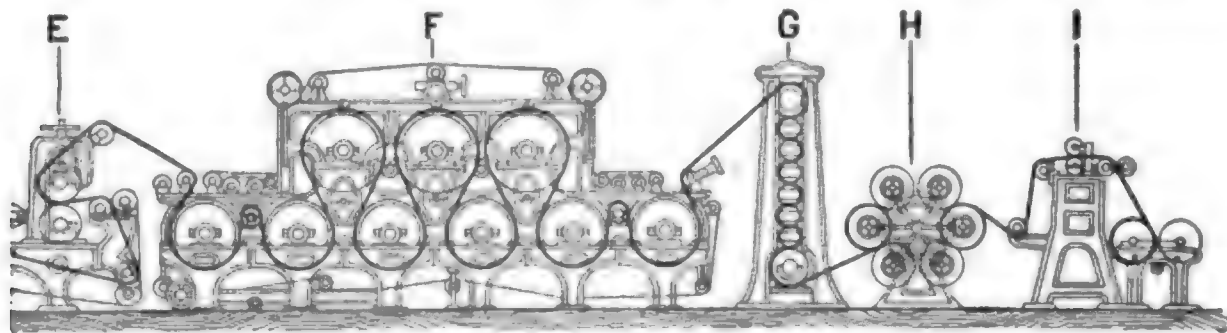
FOURDRINIER MACHINE IN SECTION.
